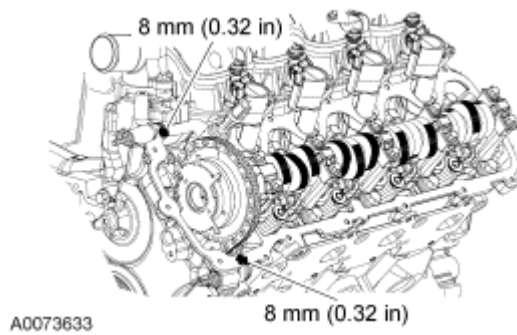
Applying Bead Of Silicone Gasket And Sealant In 2 Places Where Engine Front Cover Meets Cylinder Head
